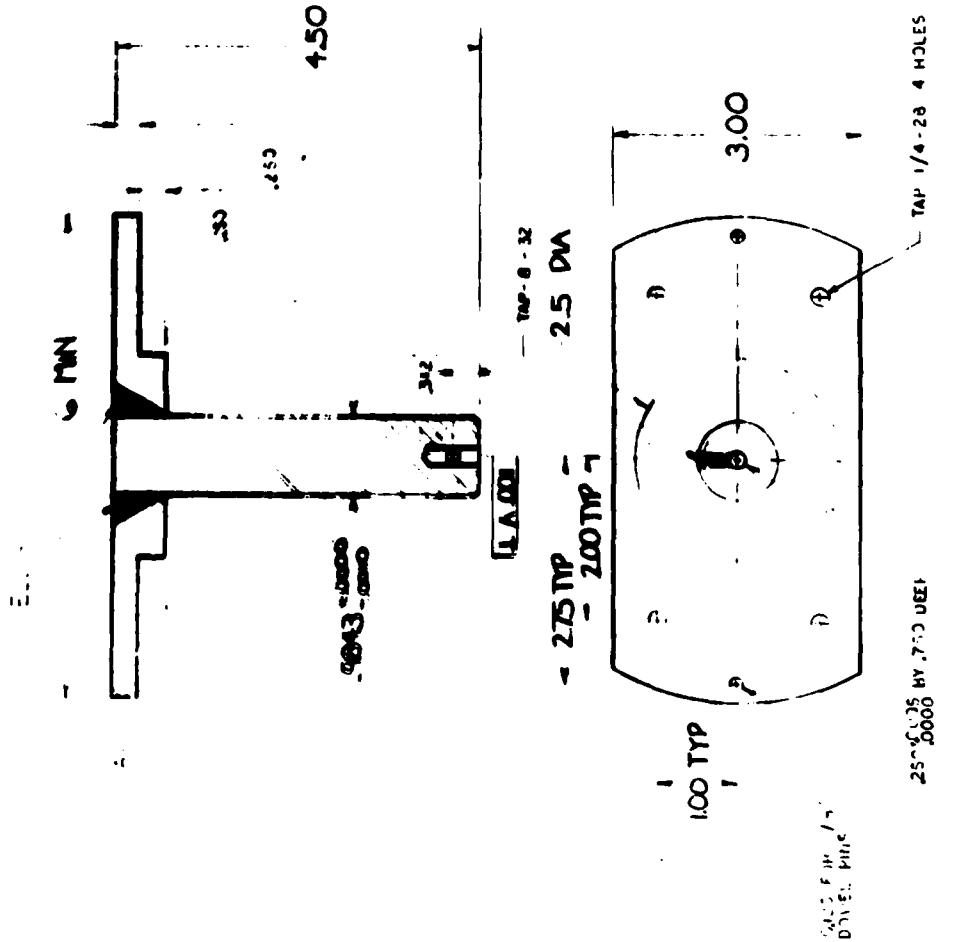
Bearing Block Mounting Bracket for Azimuth Axis
